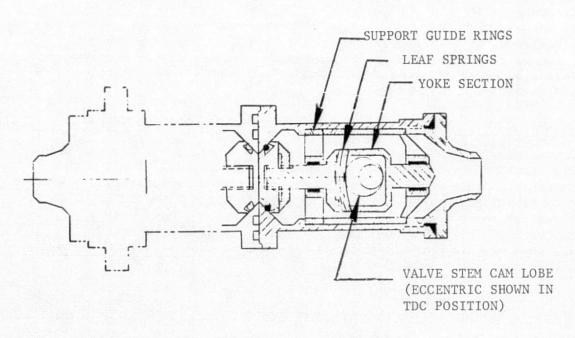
CUTAWAY PLAN VIEW OF PID
